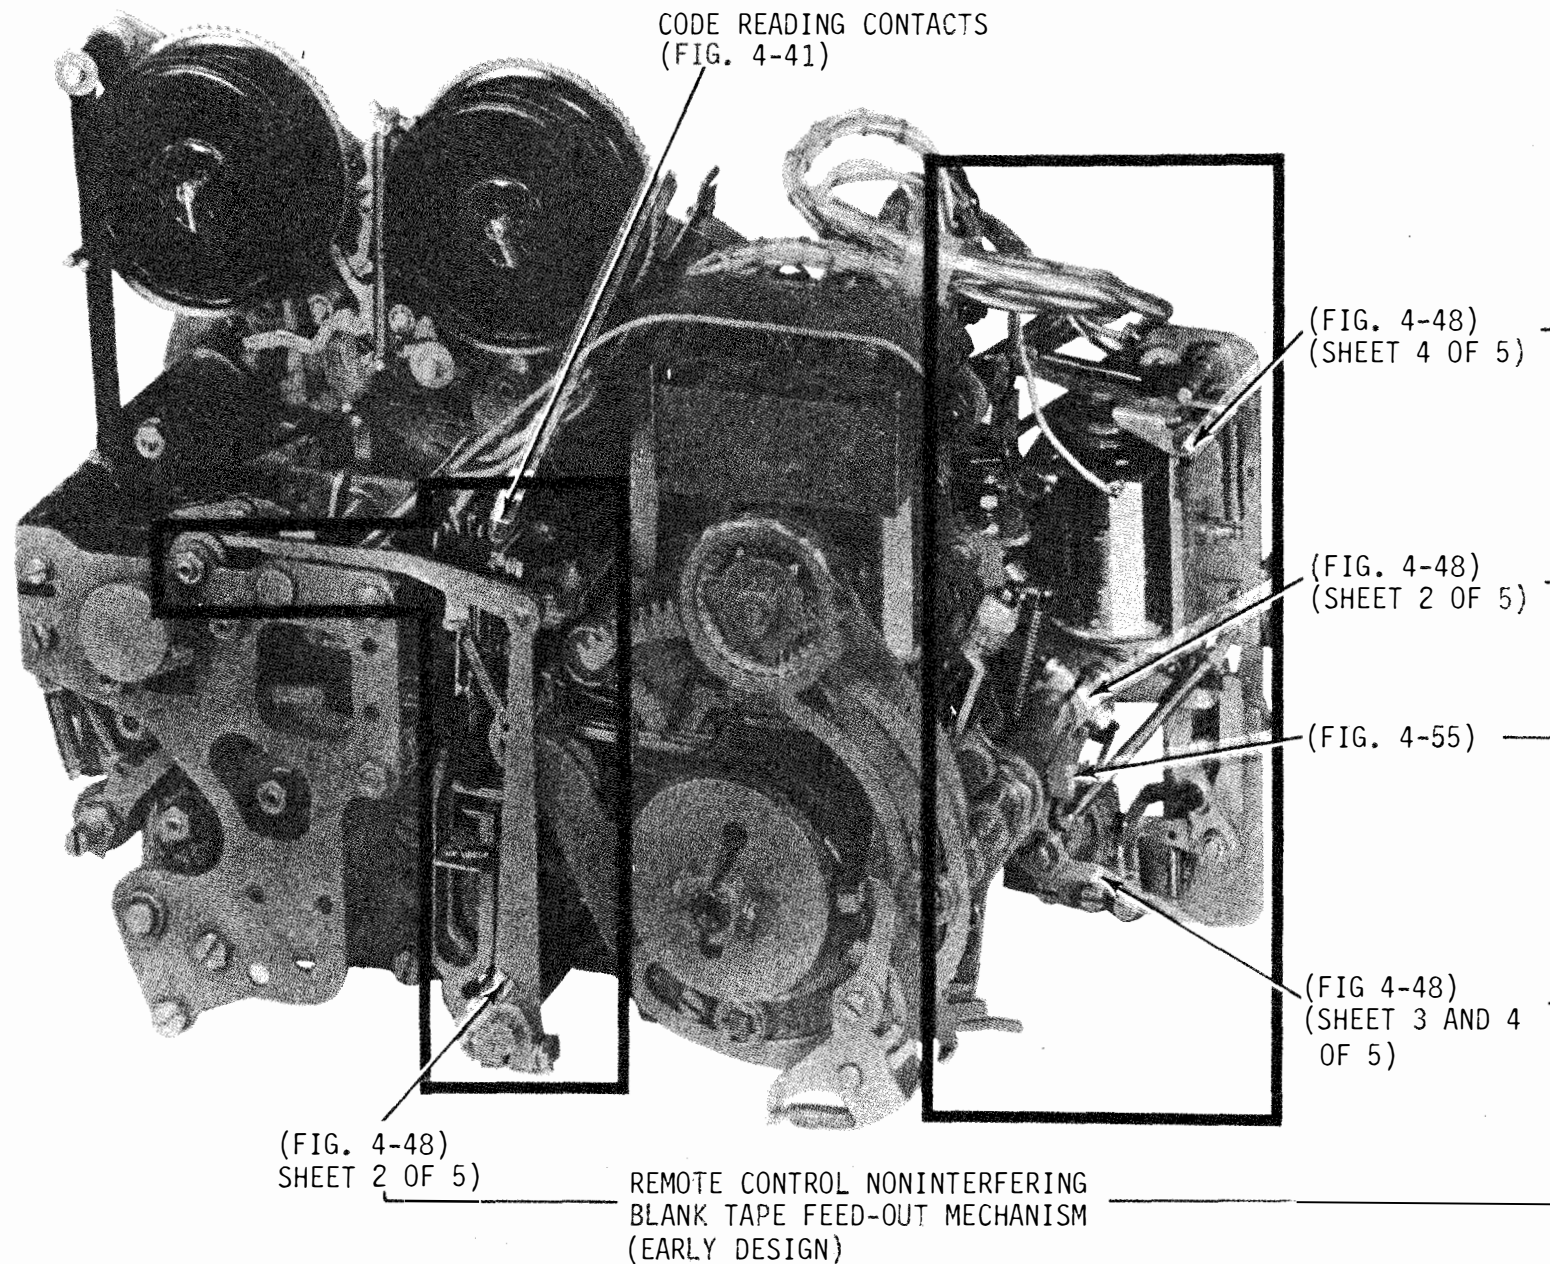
Remote Control Noninterfering BLANK Tape Feed-Out Mechanism (Sheet 1 of 5)
